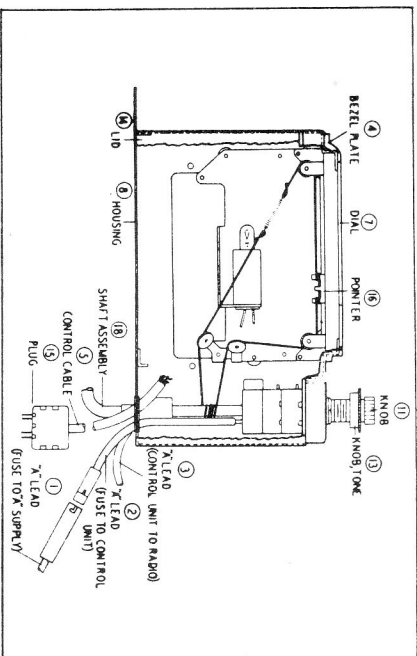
Control Unit C623M (Chrysler), Showing Location of Parts and Dial-Cord Installation Details
